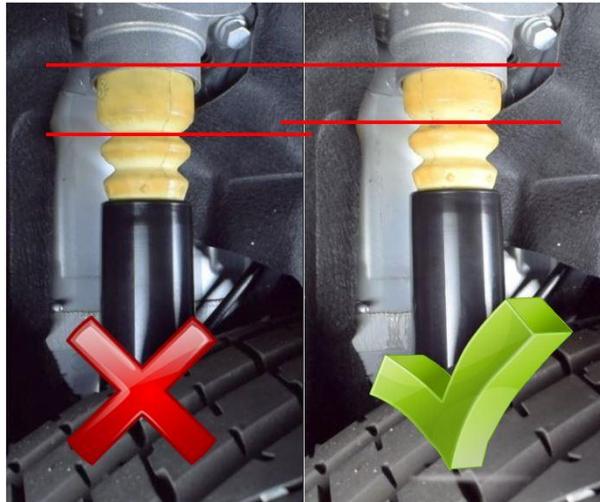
Comparison between rear bump stop installation without and with the SET900 tool.
